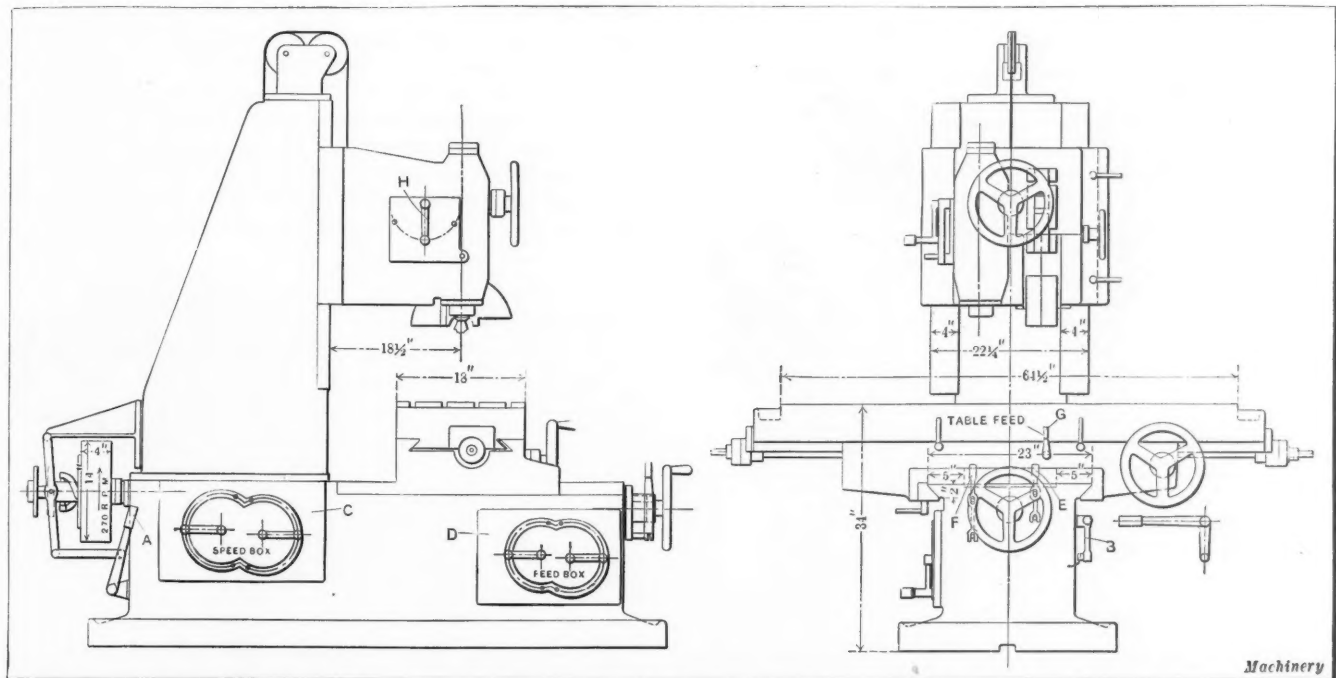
Side and Front Views of the Machine, showing Arrangement of Drive and Control of Various Movements
